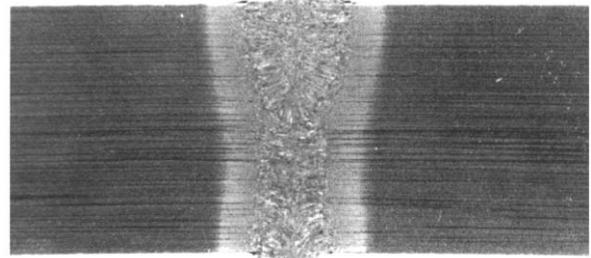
Transverse section through a full penetration keyhole weld made in a carbon-manganese steel of thickness 6mm using an Nd: YAG laser beam
